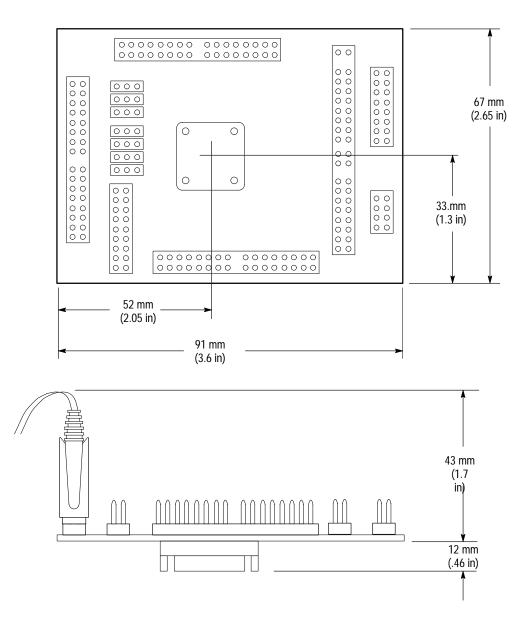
Minimum clearance of the 68331/332 QFP probe adapter
